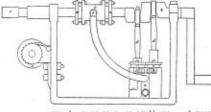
ELEVATION-SCALE $1\frac{1}{2}$ INS. = 1 FOOT.
